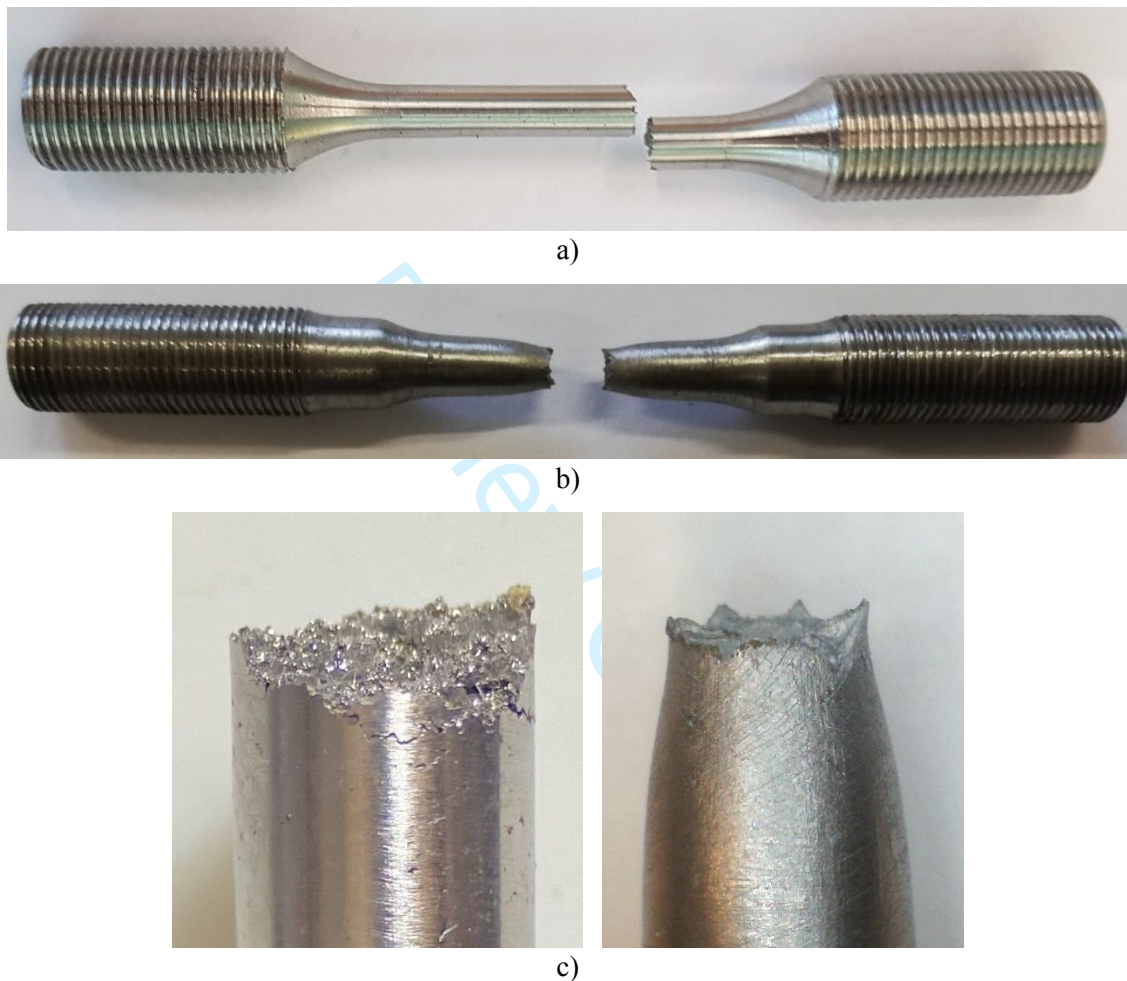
Uniaxial tensile specimens: a) SLM (B11); b) conventional (A14); and c) detailed view of fracture surfaces – SLM and conventional, respectively.
